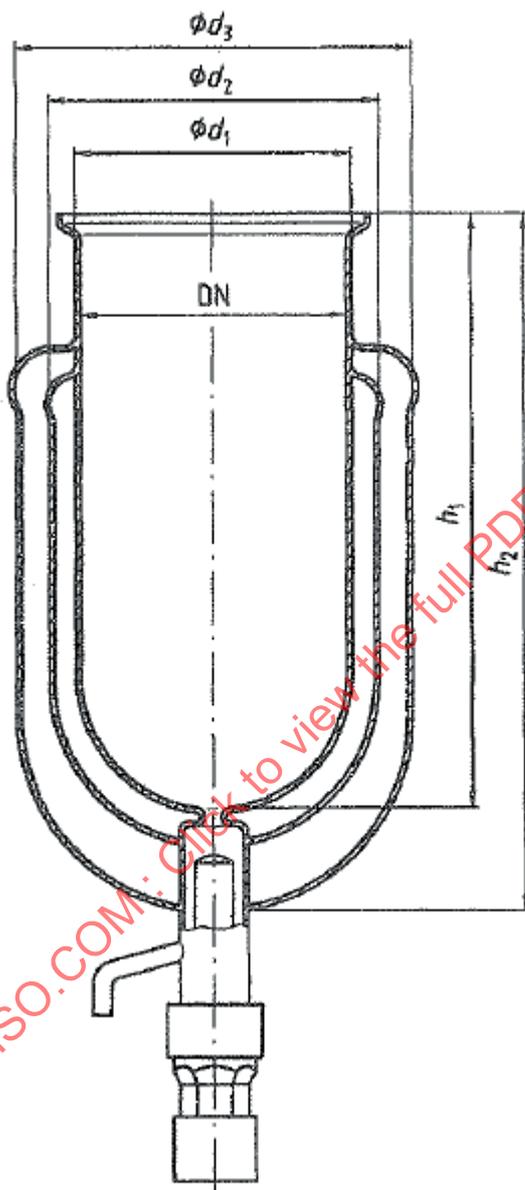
Example for a reaction vessel with outlet stopcock, heating/cooling jacket and flat flange
